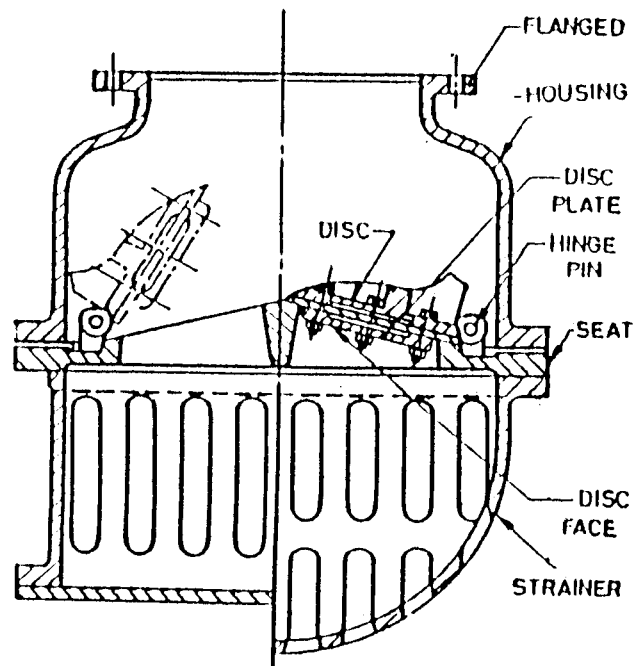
TYPICAL SKETCH OF SWING TYPE VALVE (WITH DOUBLE DISC)
